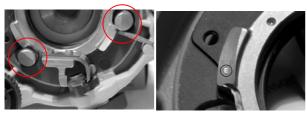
+b - Detail view (from below) of the upper tribrach plate showing the instrument released (a); Detail view of a clamping flange (b)
